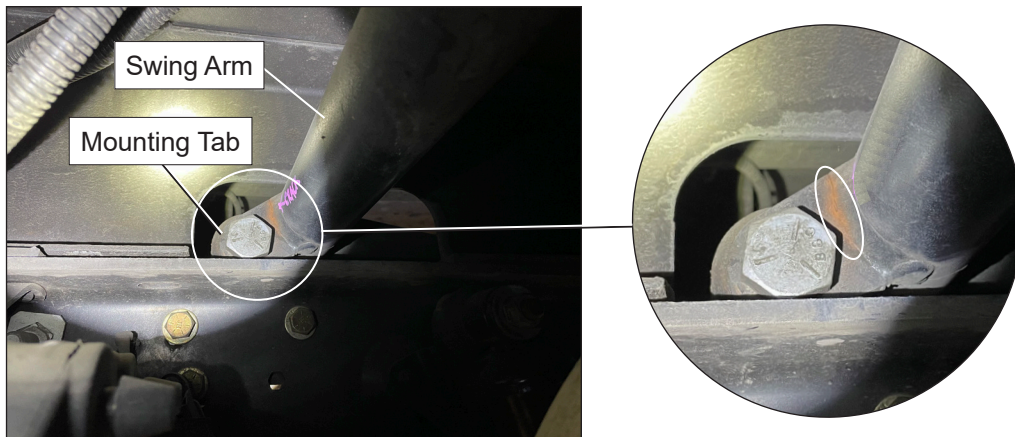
Example of Cracking in Swing Arm Mounting Tab Weld
